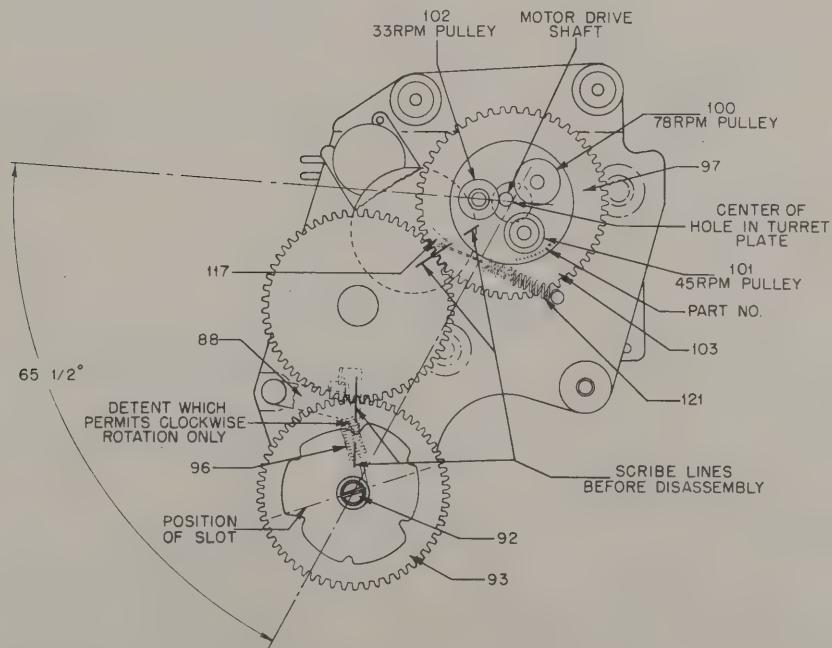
MOTOR GEAR TRAIN ASSEMBLY
